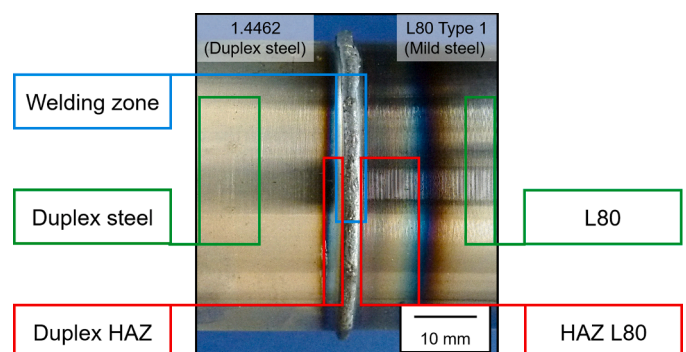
Macroscopic appearance of full size samples after corrosion testing.
